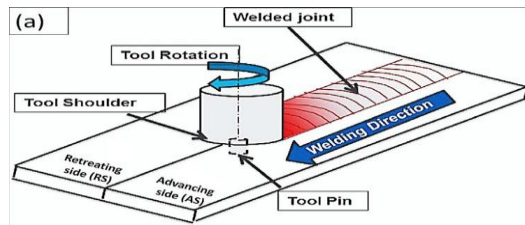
Schematic of The Friction Stir Welding Process [3]
